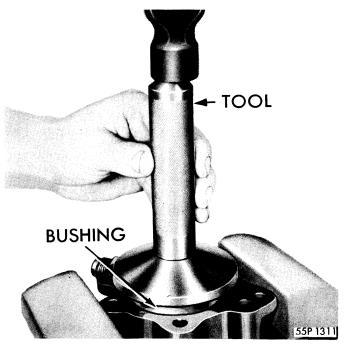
Installing Babbitt Bushing in Body Using Tool C-3251
